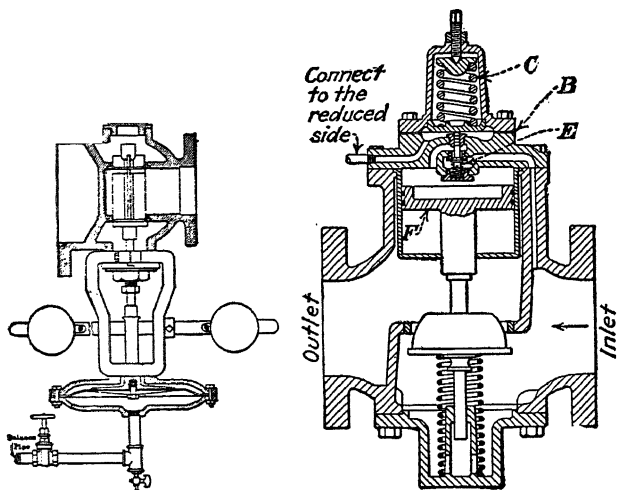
Reducing valves, a, rubber-diaphragm type; b, pilot type.
